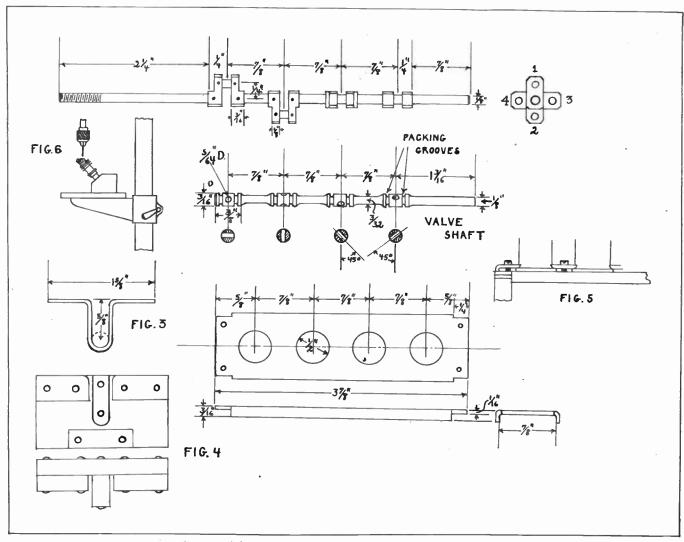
The center bushing is only $\frac{3}{8}$ inch in length, and is split to permit its being placed on the shaft.
